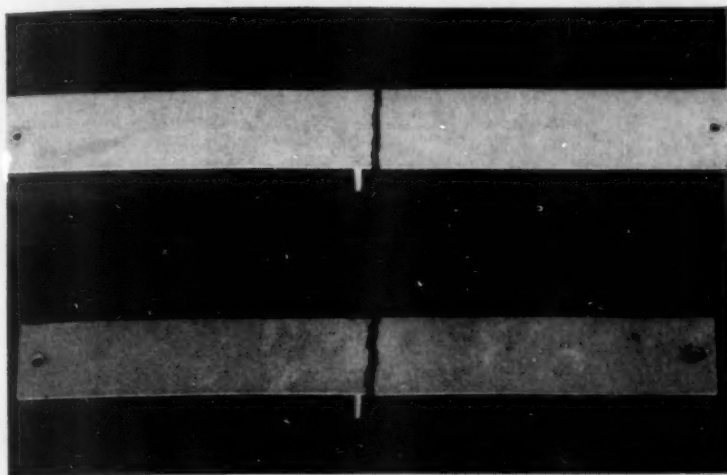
TEST PIECES OF 4 PER CENT COPPER ALLOY.
